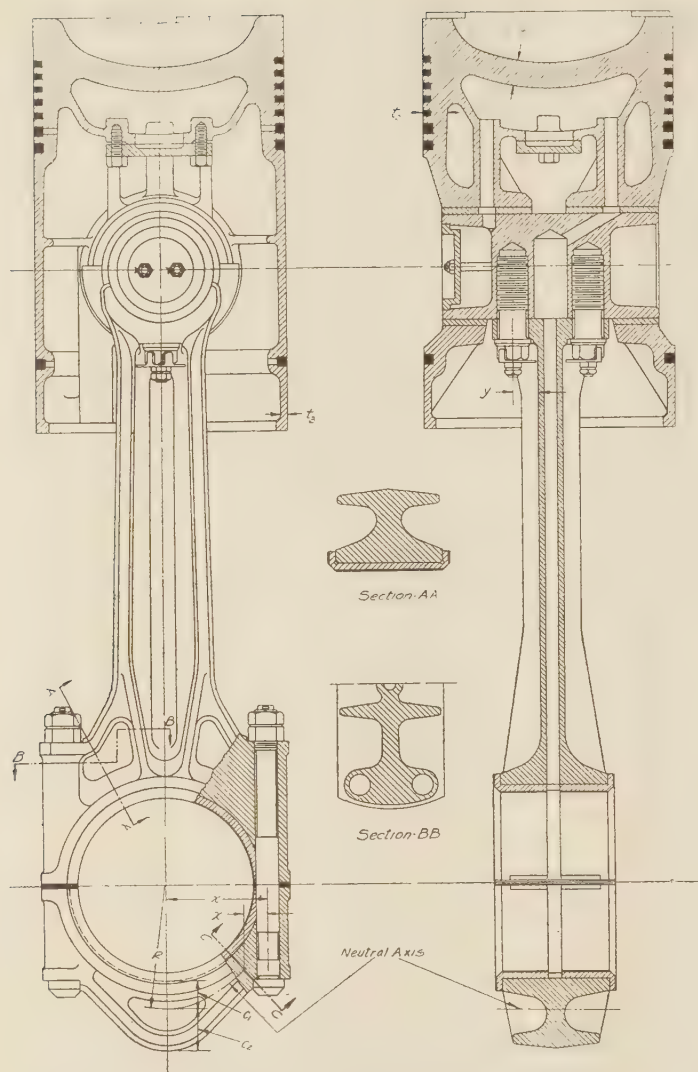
PISTON CONNECTING-ROD ASSEMBLY
